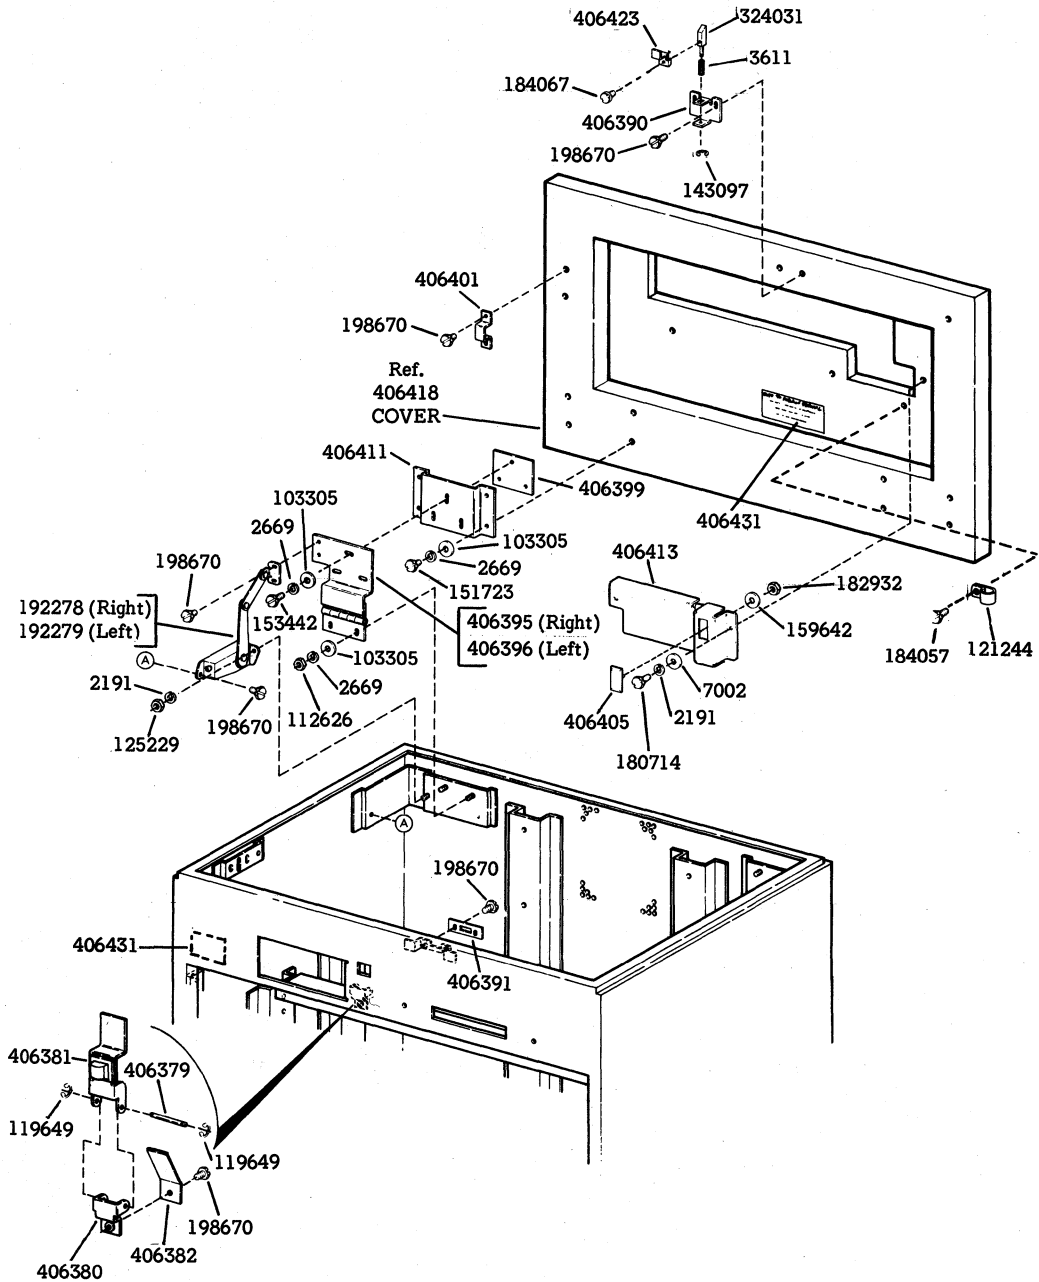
CAB302/ZZ Printer Cabinet Core for Forms Access Printer Cabinet (Cont)
